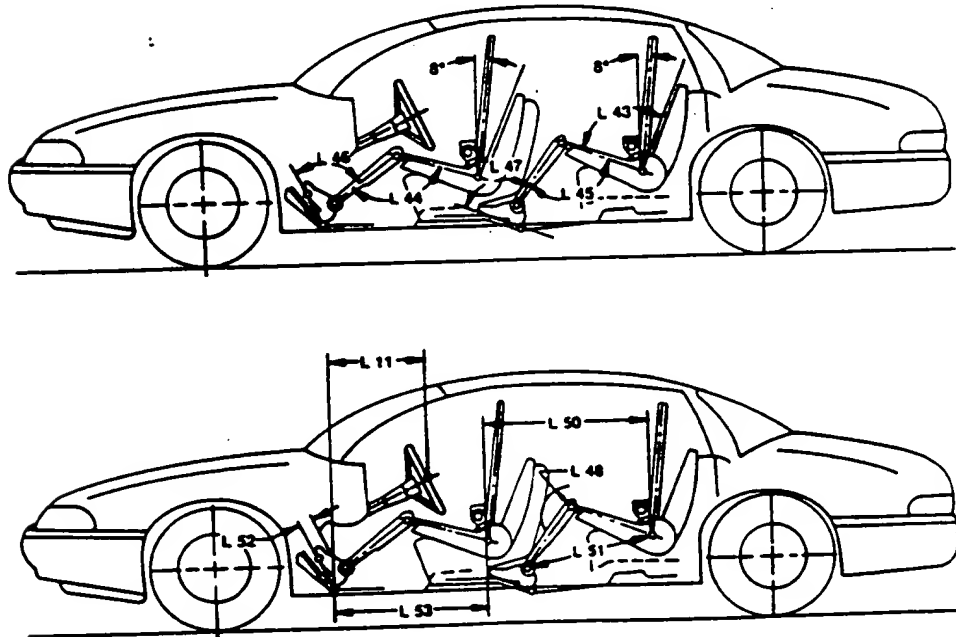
INTERIOR DIMENSIONS, LENGTH
